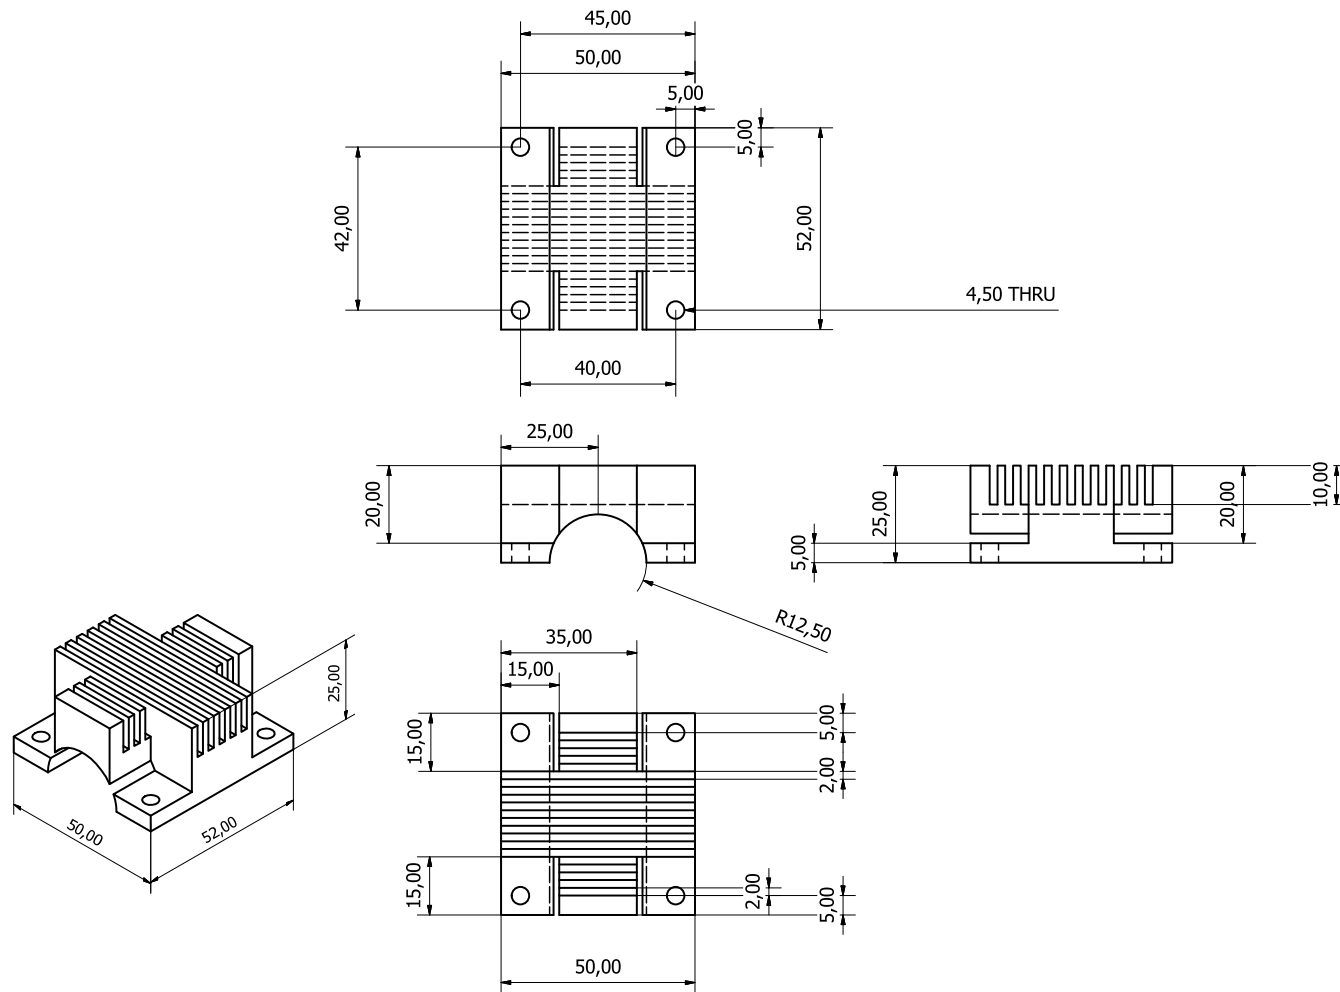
Technical drawing of the NIR laser heatsink. Material: aluminium.
